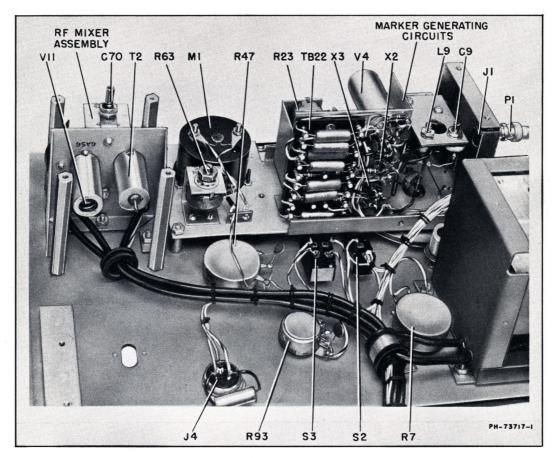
Marker and RF Mixer Units, Shields Removed, Top View
